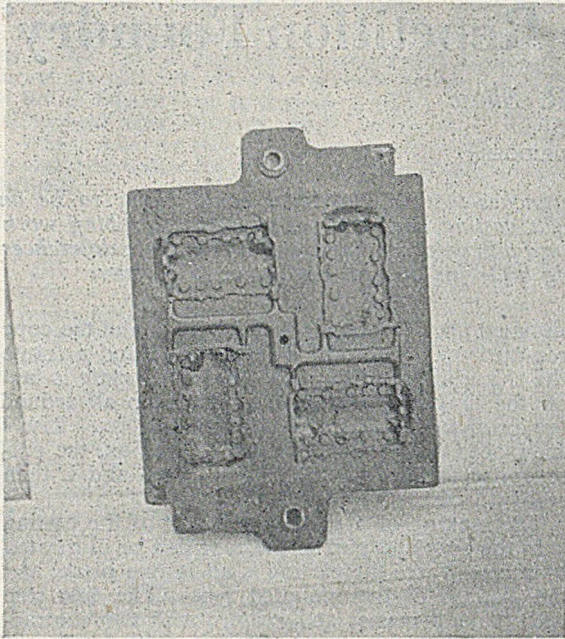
Example of a Cast-iron Patternplate, the Four Patterns, Runners and Plate being cast in One Piece.
